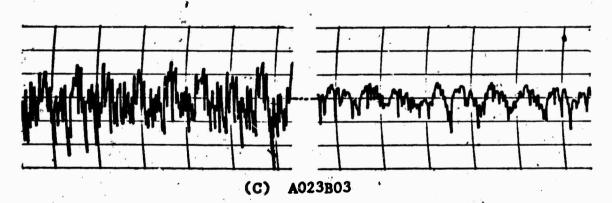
Raceway Surface Finish (P/N 114DS240 Bearing).
